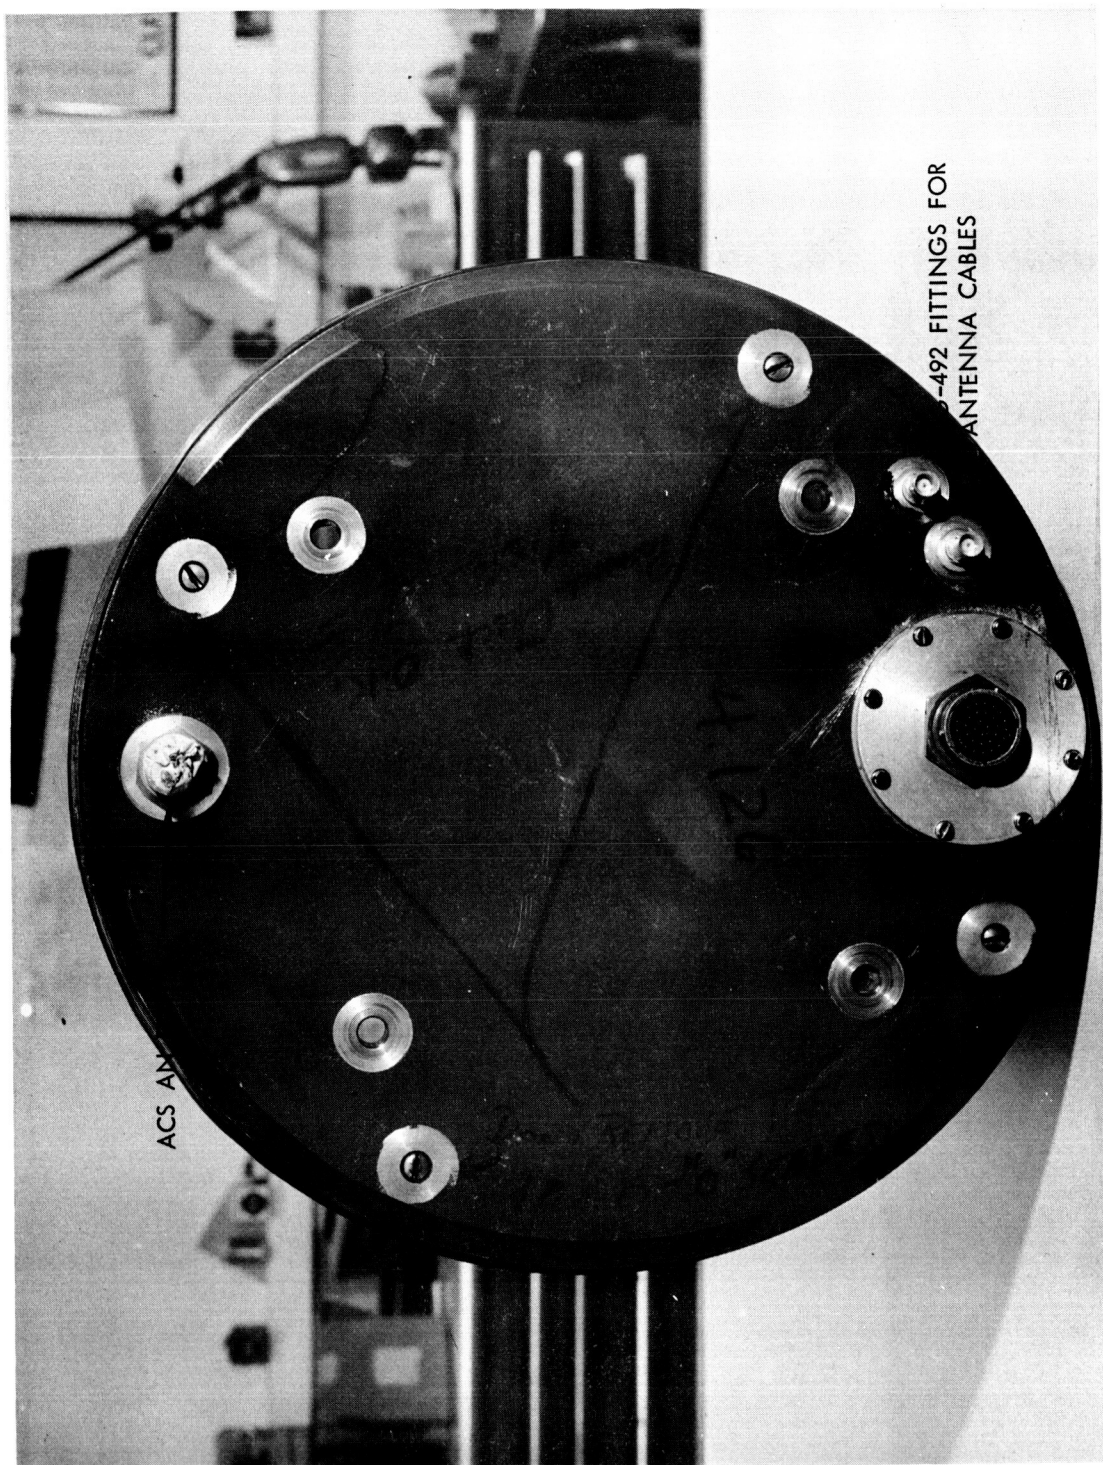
View of Top Surface of Parachute Extension, ready for installation of parachute. The 2-inch hole at the bottom center, for the electrical male plug, has been sealed with plate and O-ring to hold the through bulkhead connector (TBF).
